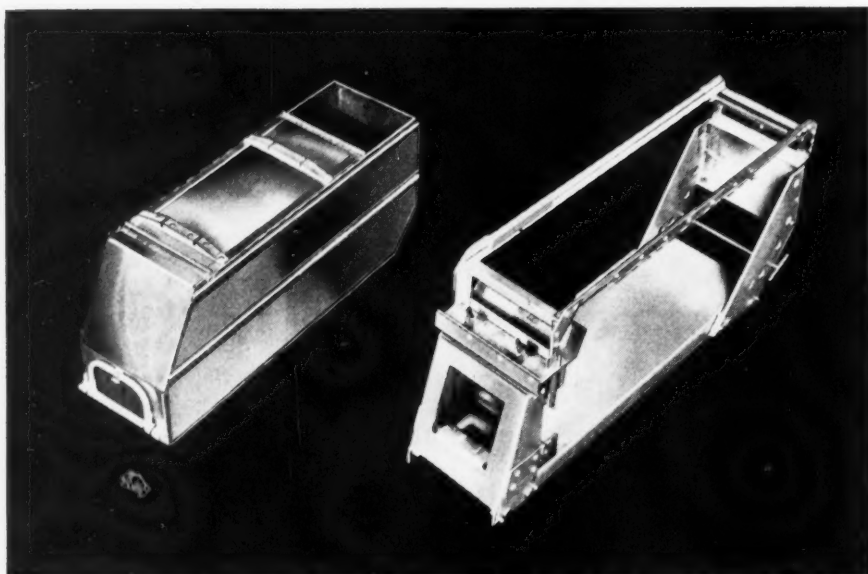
(Left) Ammunition Drawer of Stainless Steel, and (Right) Jig that Insures Interchangeability of All Drawers of This Type
